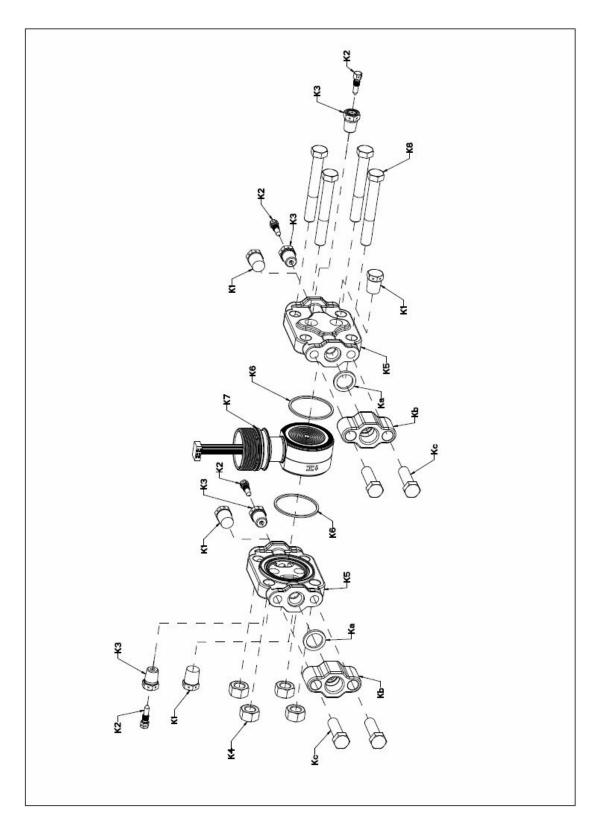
ST 700 Models STD710, 720, 730, & 770 (Refer to Table 18)
